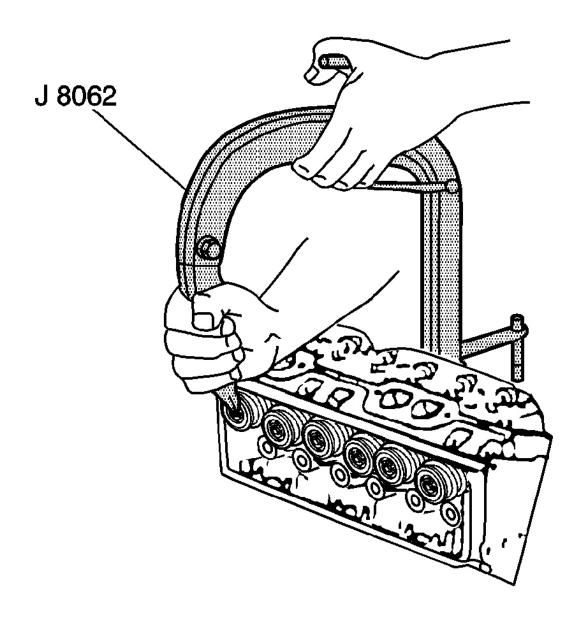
Compressing Valve Springs Courtesy of GENERAL MOTORS CORP.
